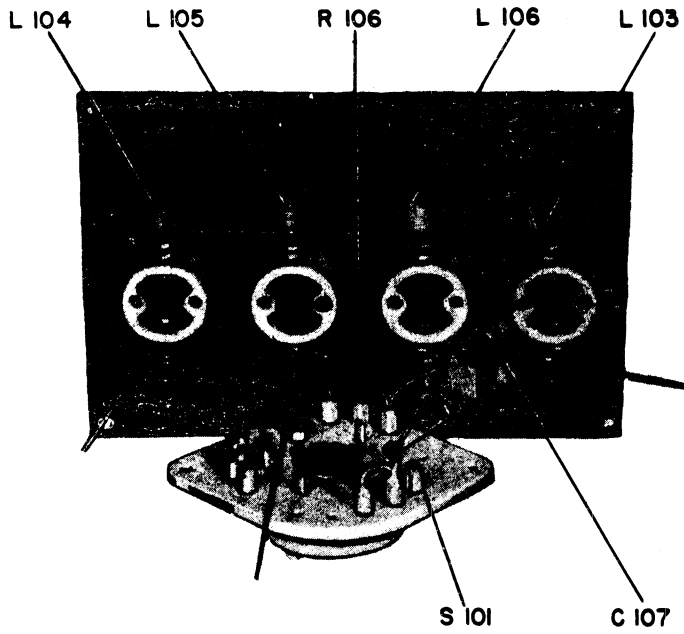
Transmitter Exciter Plate-Tank Assembly — Top View
